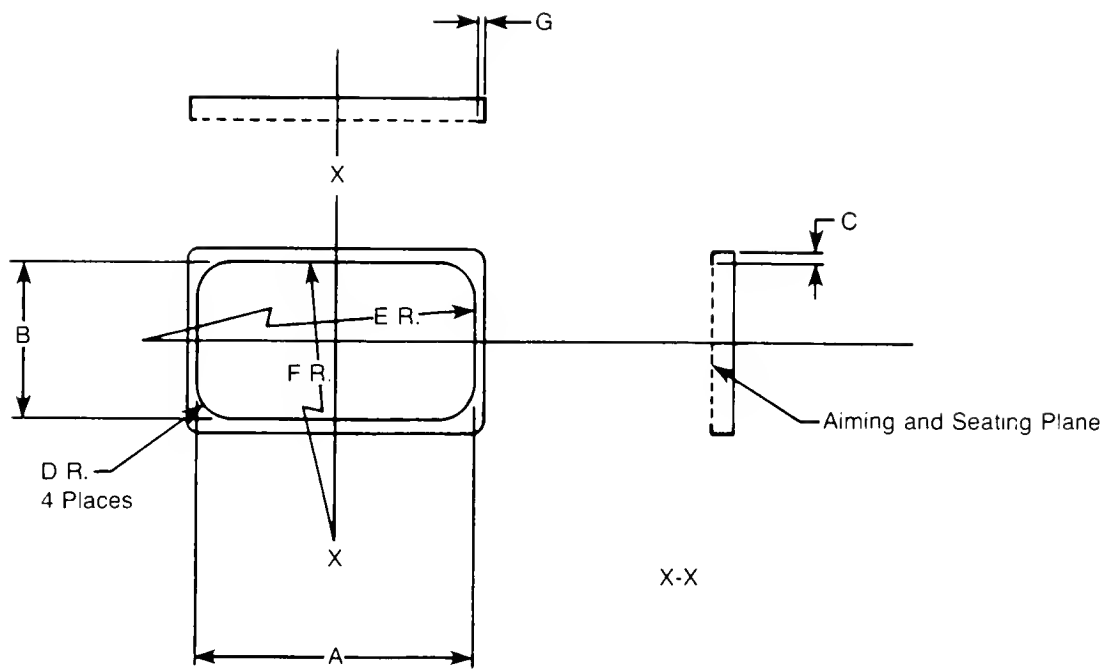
Type UF Rectangular Sealed Beam Headlamp Unit
